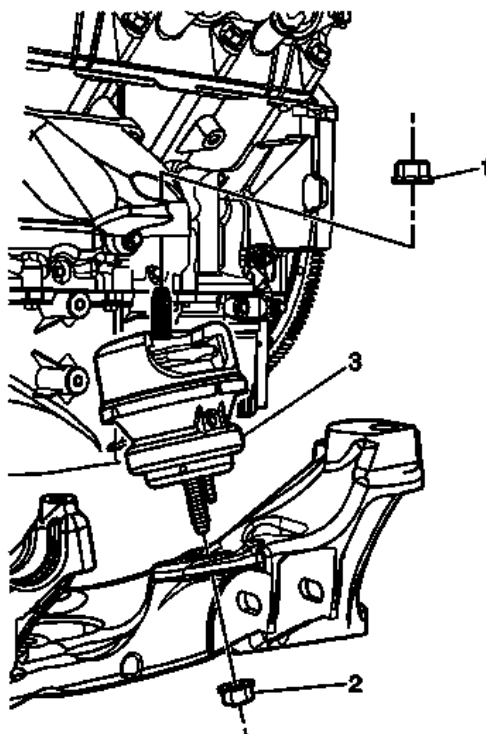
Identifying Engine Mount - Left Side (RWD)
